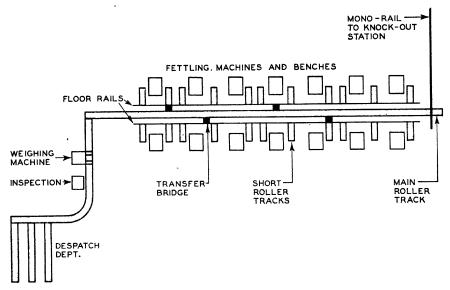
Fettling shop layout which reduces operator fatigue by minimising the NEED FOR LIFTING THE CASTINGS
